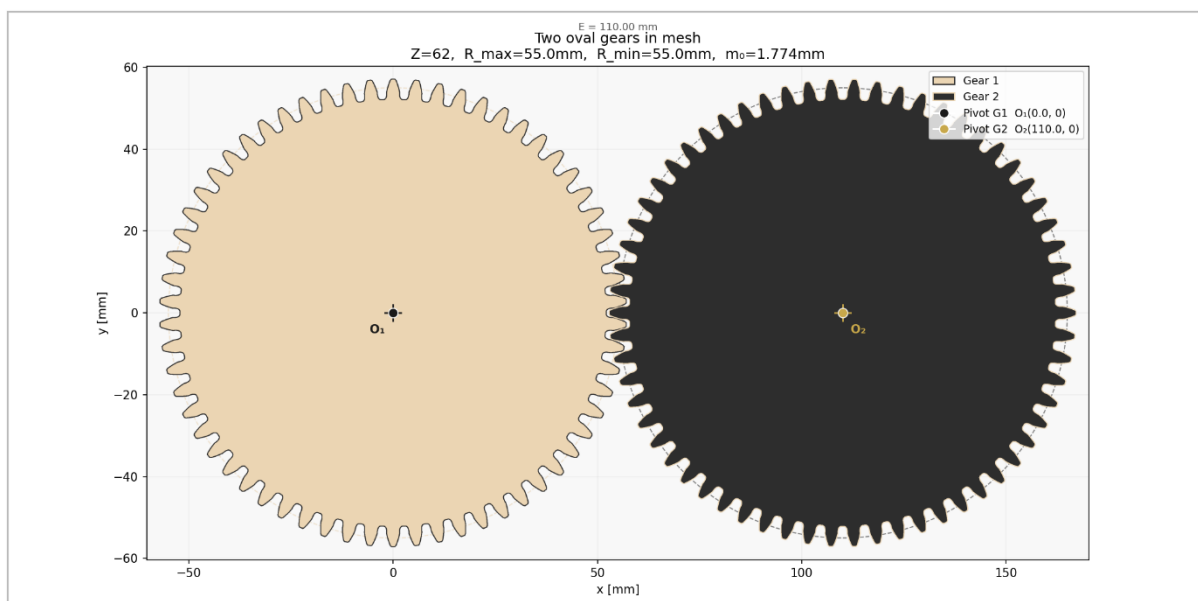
Two circular gears in mesh. Gear 1 is the driver, the gear on the left, rotating at constant speed. Gear 2, driven, is rotating at constant speed (neglecting manufacturing errors, teeth deformation and so on).
